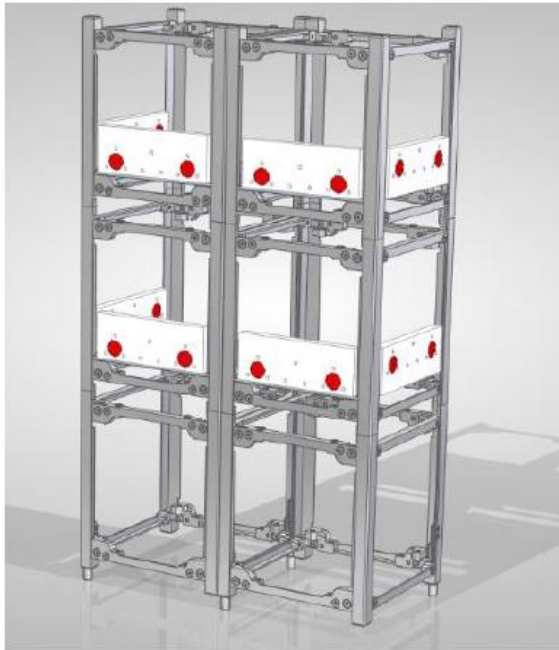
CAD model of CoreSat magnetic torque testing rig (magnets shown in red)
